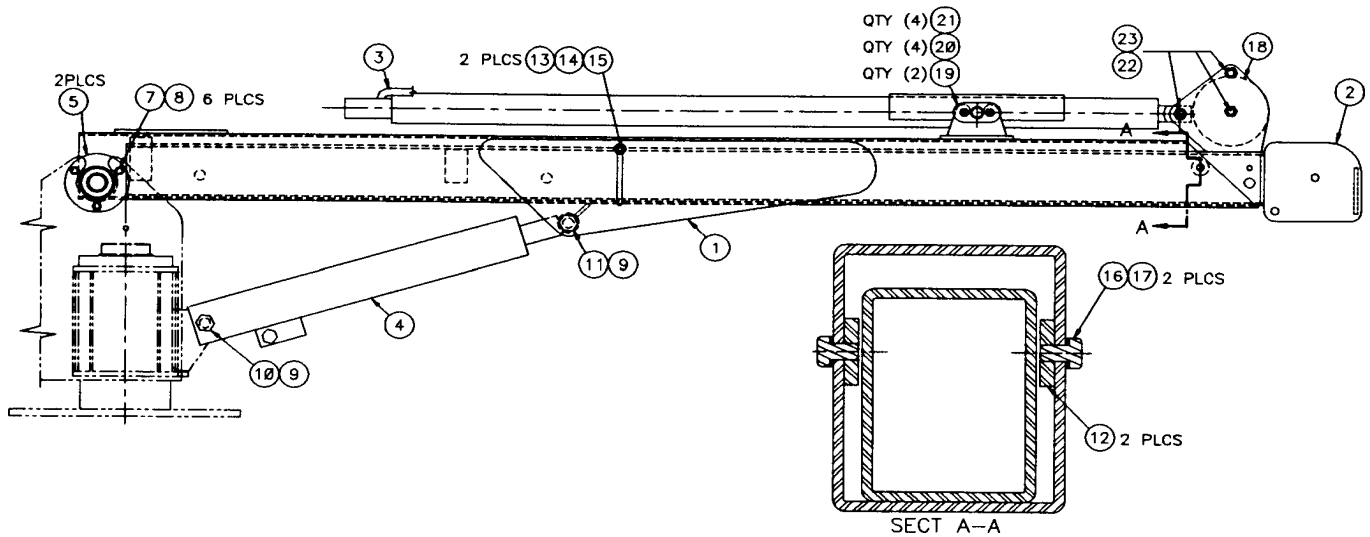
BOOM ASM-15' VERSION (41711149)
